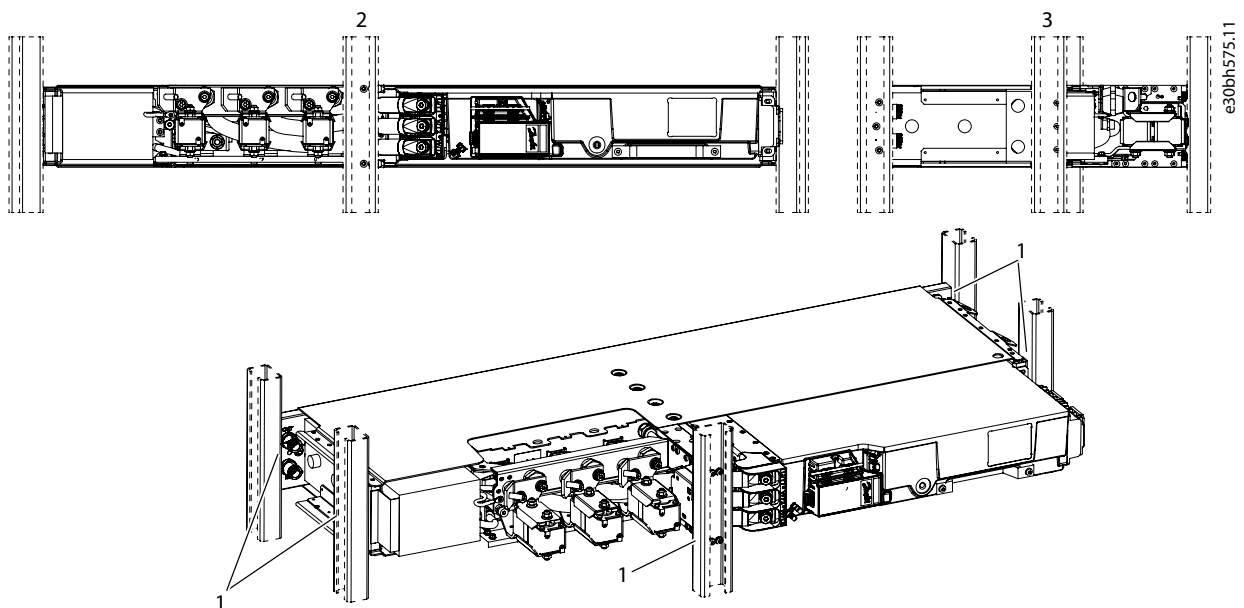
Mounting Holes of the System Module with the Integration Unit in Horizontal Position
